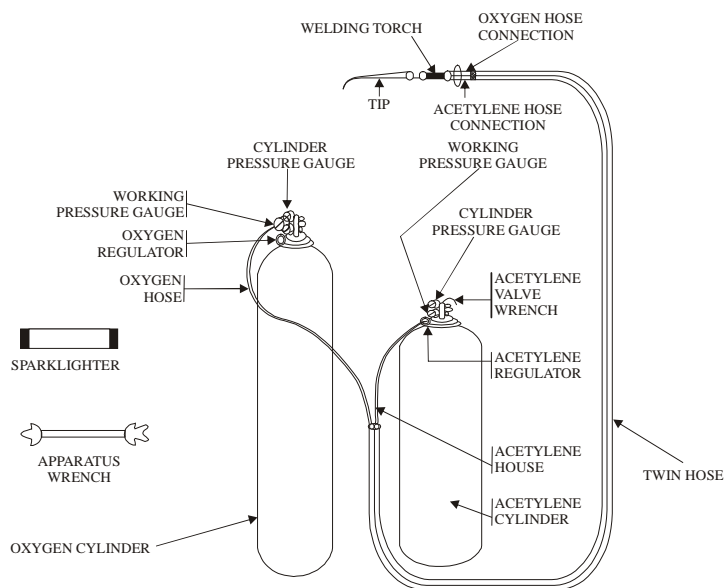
Oxy-Acetylene Gas welding
